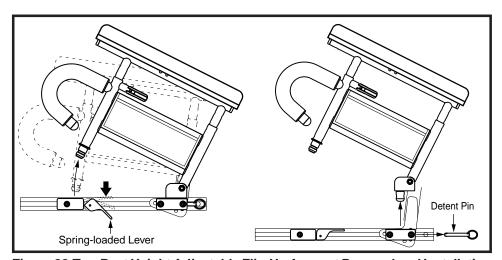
Two Post Height Adjustable Flip-Up Armrest Removal and Installation
